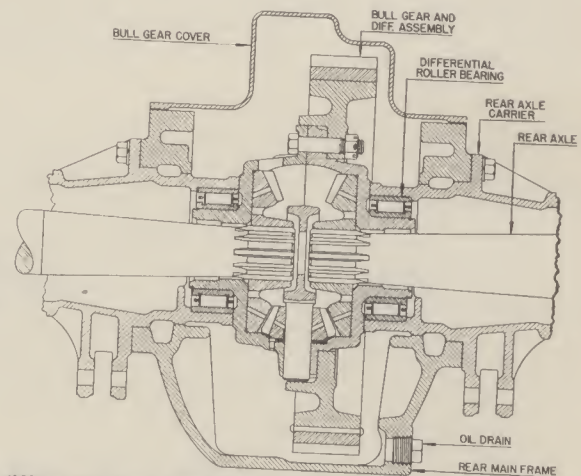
Rear view through differential and final drive of 4 speed Super 99 tractor. This design is same as used on late 4 cylinder models 90 and 99 tractors.
